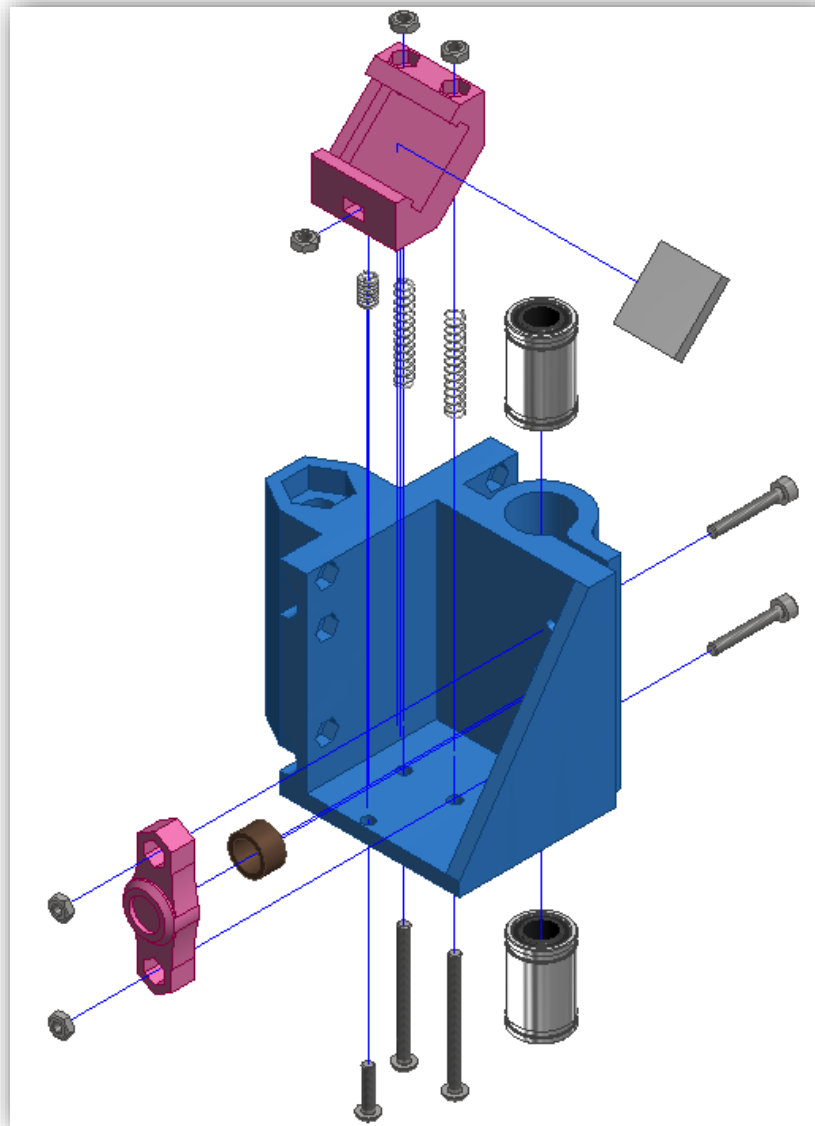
Component 3 (X axis mirror mount) exploded view.
